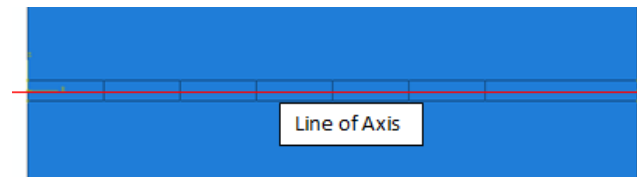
Weld line of a 2D plate model. Seven stage welding was defined for the model to complete the welding of the plate.
